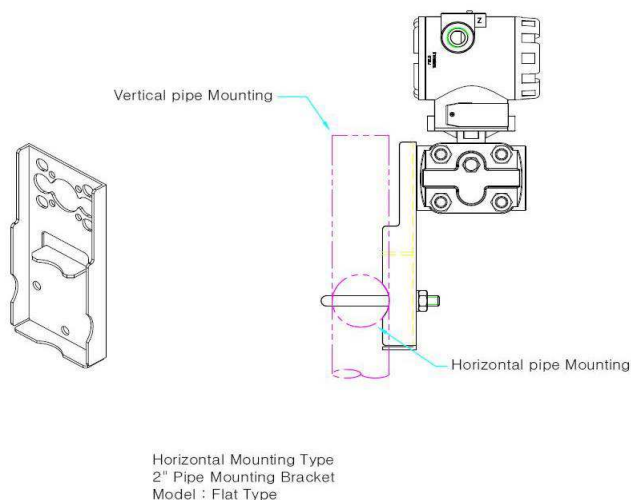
is transmitter dimensional drawings of APT3100. A mounting example and dimensional drawings is shown in Figure 4-4.
